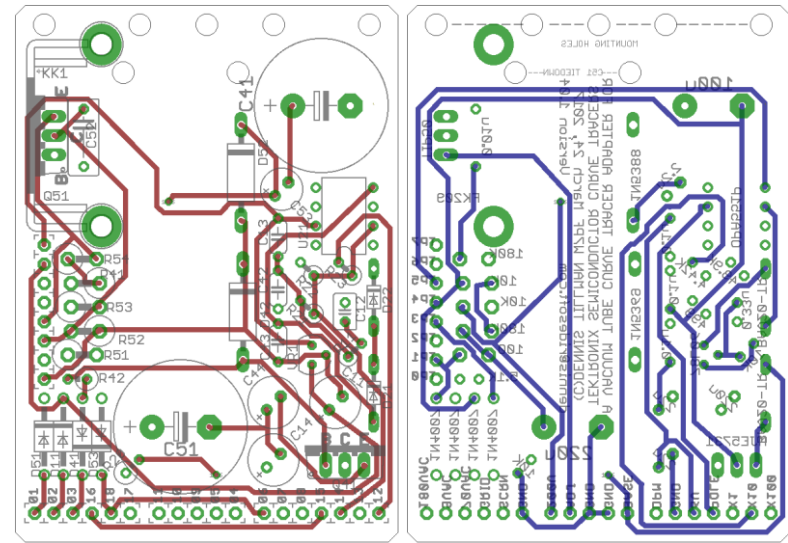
VTCT Adapter version 1.04 PC Board Artwork. Left: Component Side; Right: Solder Side..
